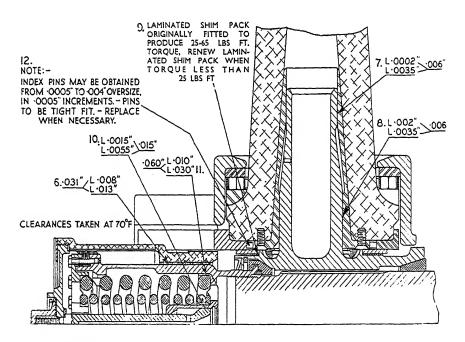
Cylinder base, blade bush, and spider bearing, etc.
